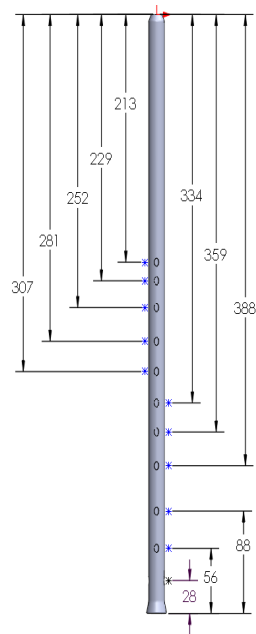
Technical drawing showing the dimensions, bore diameter, and fingerhole arrangement of a chifte kaval attributed to Beslen village and preserved at the Gotse Delchev Historical Museum, Bulgaria
